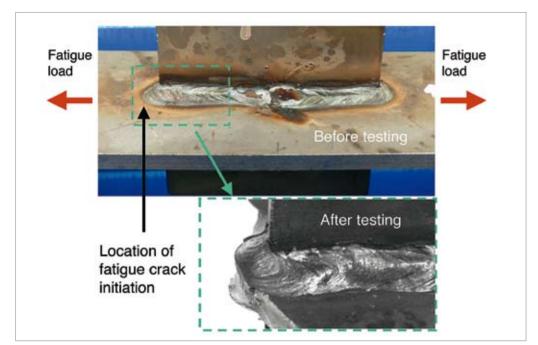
Example of fatigue test specimen with fillet welds. When fatigue load is applied in the longitudinal direction (arrows) fracture is commonly found to initiate at the fillet weld toe. The enlargement shows one half of the separated test specimen.
